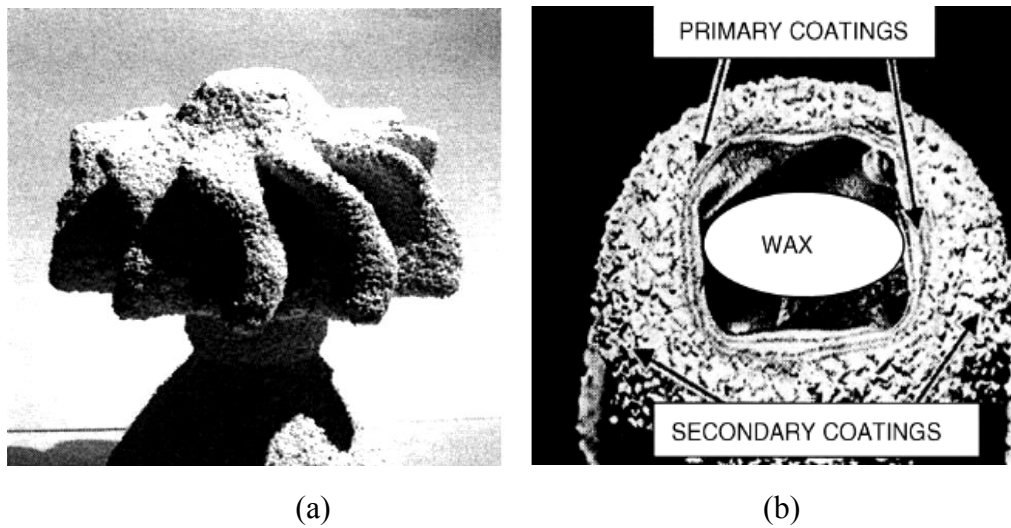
(a) a finished turbo-charger wheel mould and (b) the cross section of the pattern before de-wax [32]
